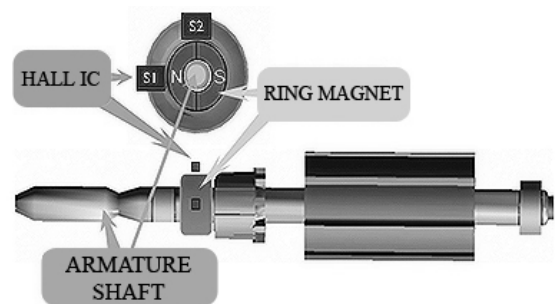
Hall IC position installation on DC motor rotor of the benchmark system
